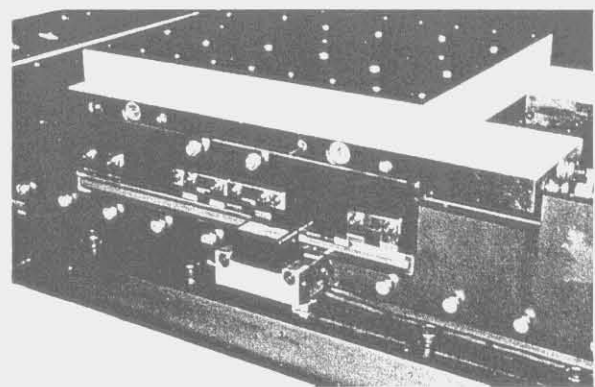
Hydrostatic oil-bearing guideway for reducing static friction of the bearing surface in the slide (Photo from Taylor Hobson Pneumo Co.)
